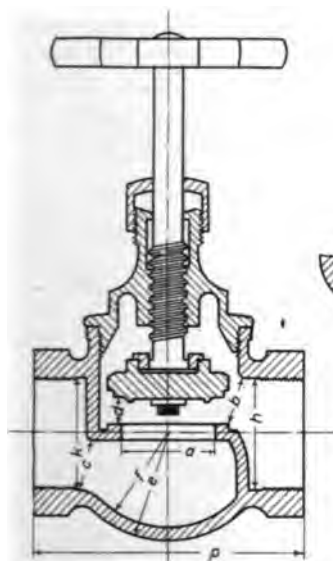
Section Through Crane Globe Valves. Sizes Tested: $\frac{1}{2}$, $\frac{3}{4}$, 1, and 2-inch Diameter. Enlarged Section of Valve Disc and Seat Shown in Figures 20, 21, and 22, Page 31. Dimensions Given in Table 2, Page 26.
